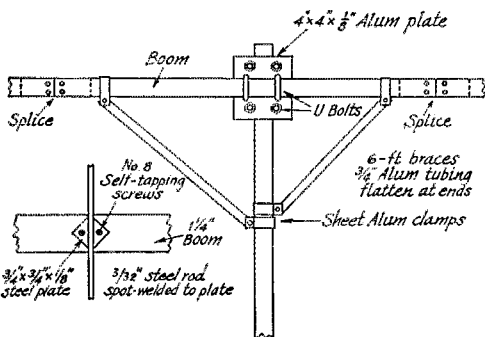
Boom support and element mounting methods used in the 13-element Yagi.
